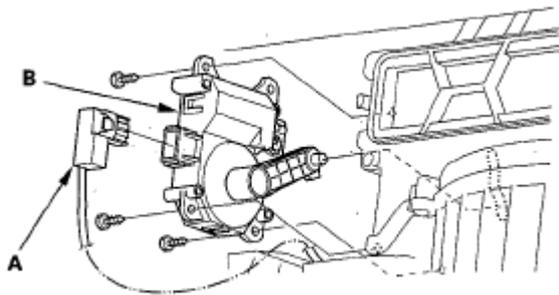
Identifying Recirculation Control Motor And Fasteners
